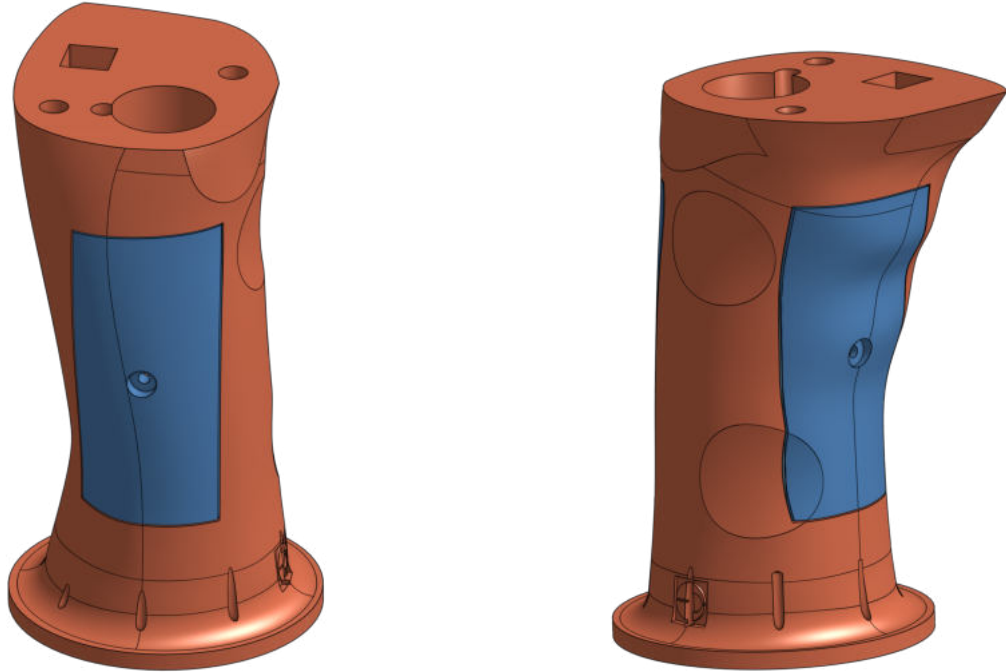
Grip bottom part (front view on the left, rear view on the right)
